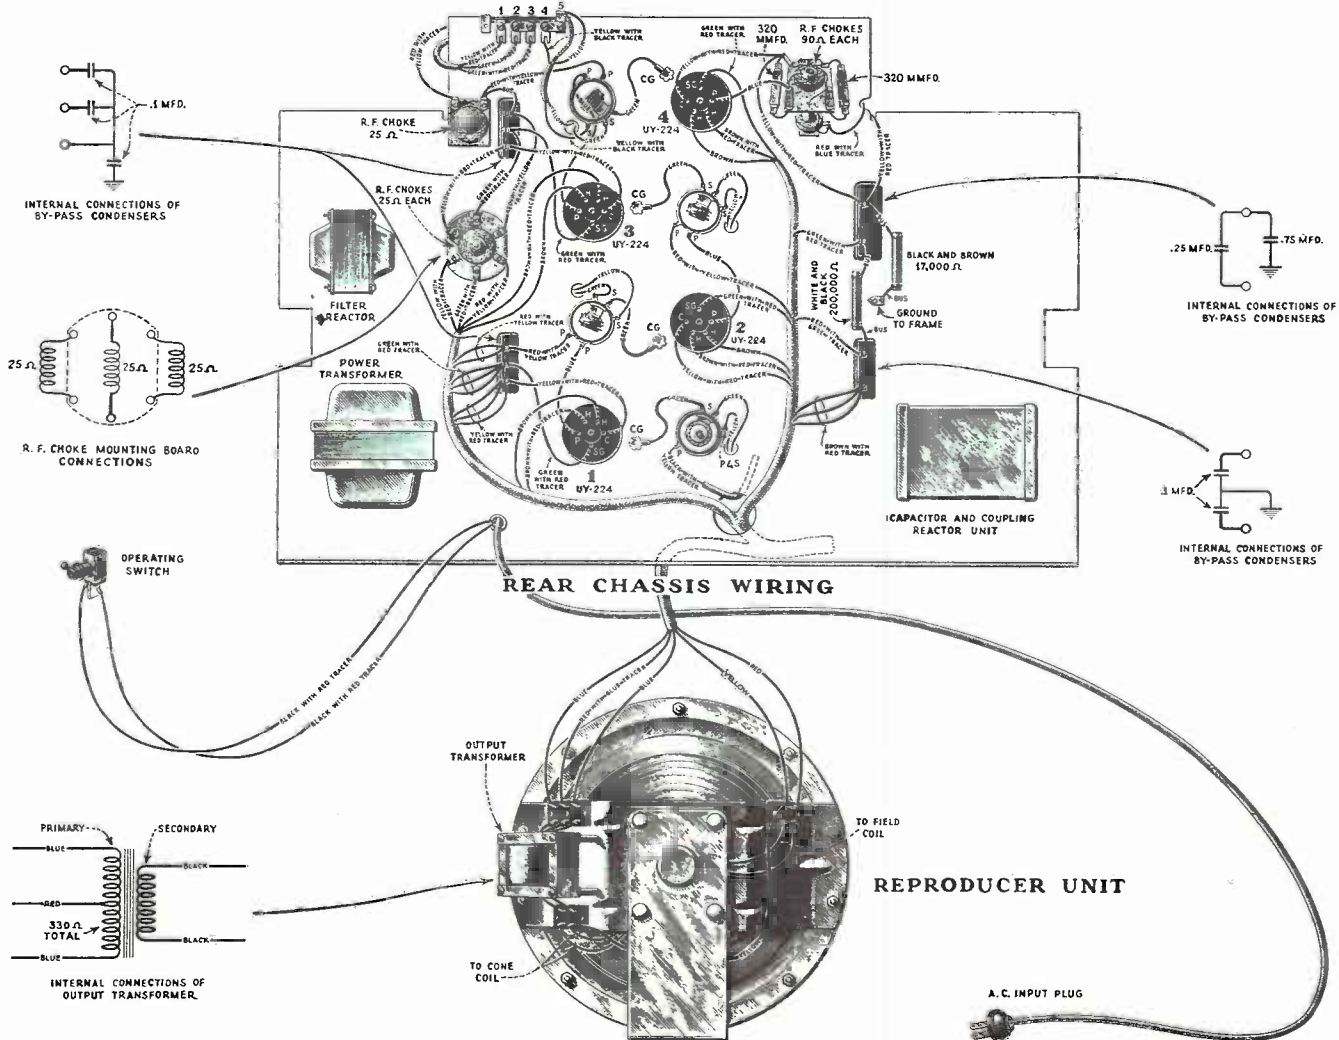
B—Complete layout and wiring diagram of the chassis (rear) and reproducer unit
